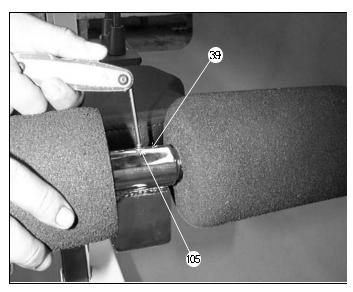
On the Bench Press Adj Seat Tube (#39) there is a threaded socket. Secure the Foot Roll Tube 1 X 16 (#100) using one Set Screw 1/4-20 X 1/4 (#105). Use the supplied Hex Key 1/8 (#69) tool for securing this Set Screw (#114).
